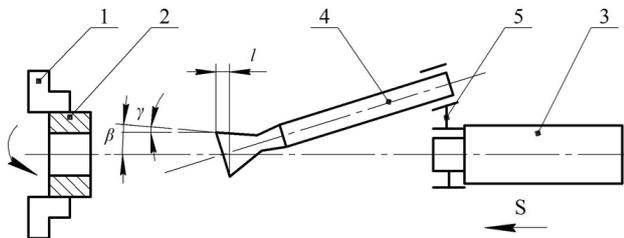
Kinematic schematic of the work of rotational head for broaching the profile openings: 1 – chuck of lathe; 2 – treated workpiece; 3 – holder; 4 – spindle; 5 – hub
